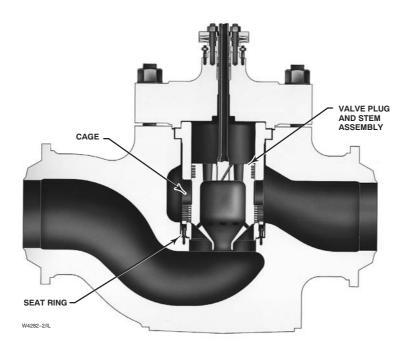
Sectional of NPS 20 Fisher® EHD Control Valve Assembly
